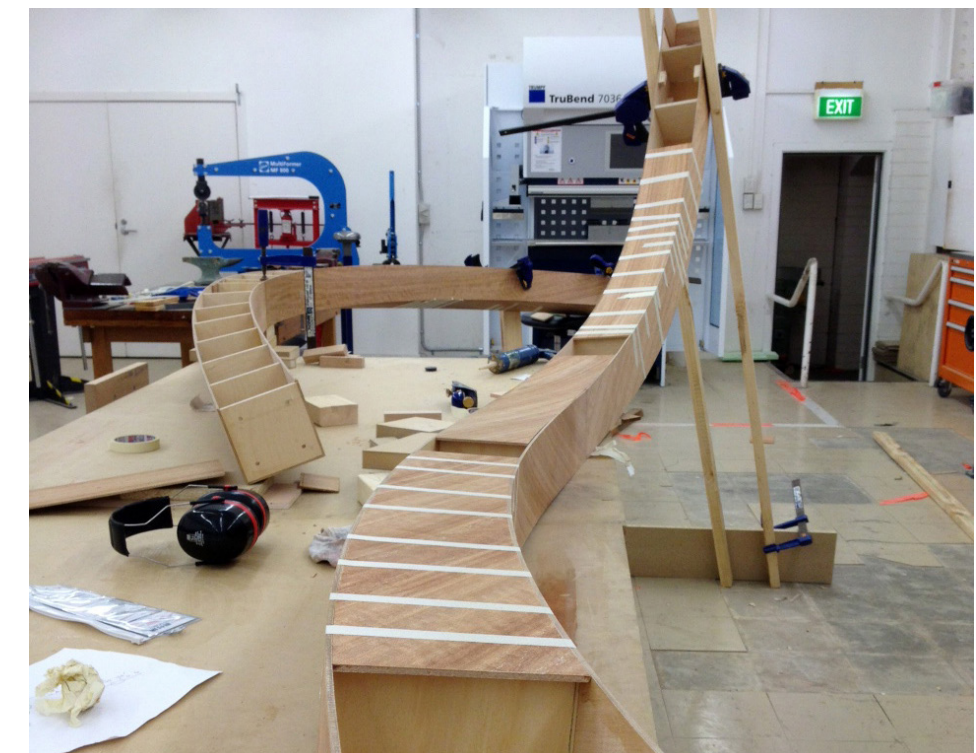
Preassembly of multiple segments to test connections and shape.
